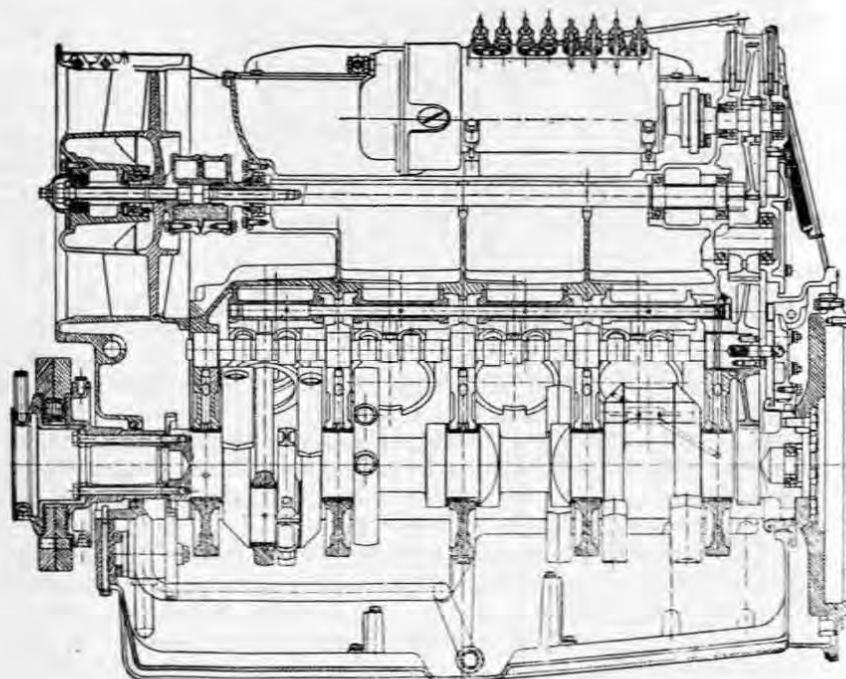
Longitudinal section of the eight-cylinder Deutz engine.
